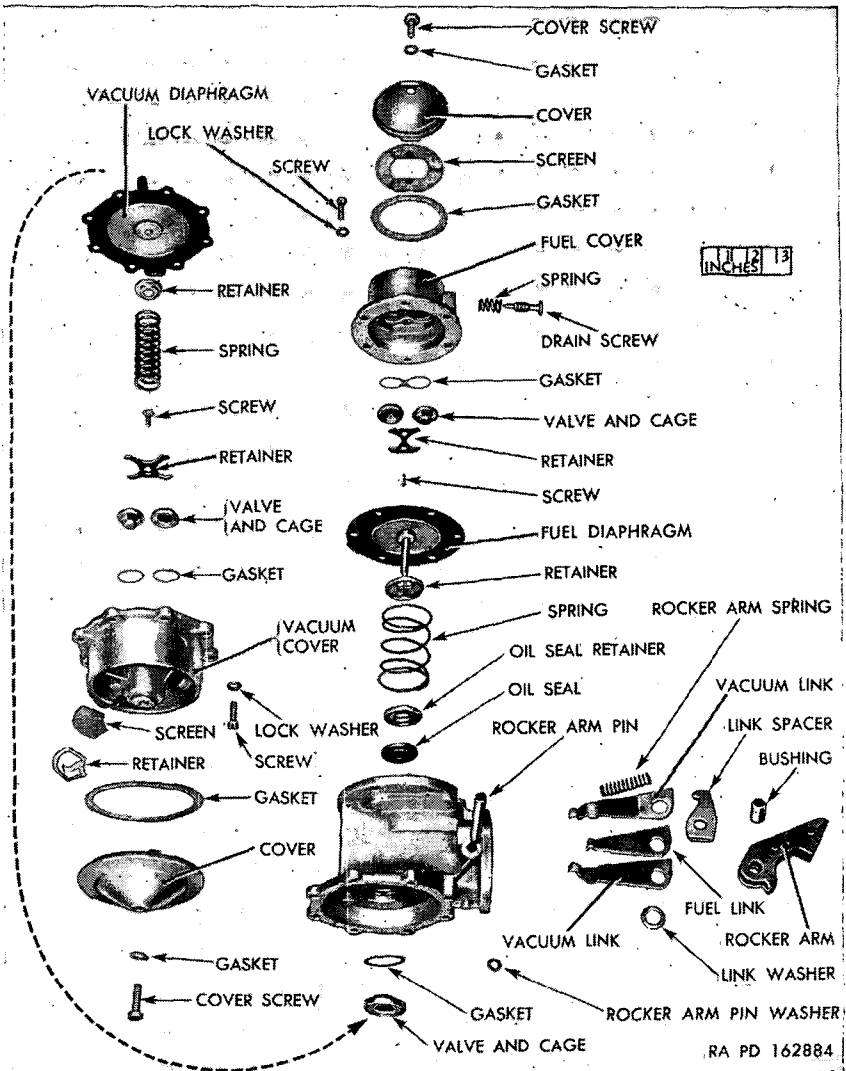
Fuel and vacuum pump—disassembled view (typical series CF construction).
